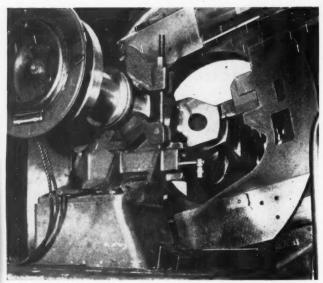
Connecting rod journals and cheeks on the crankshaft are machined in this special crankshaft lathe. The shaft is held stationary while the cutter revolves.
